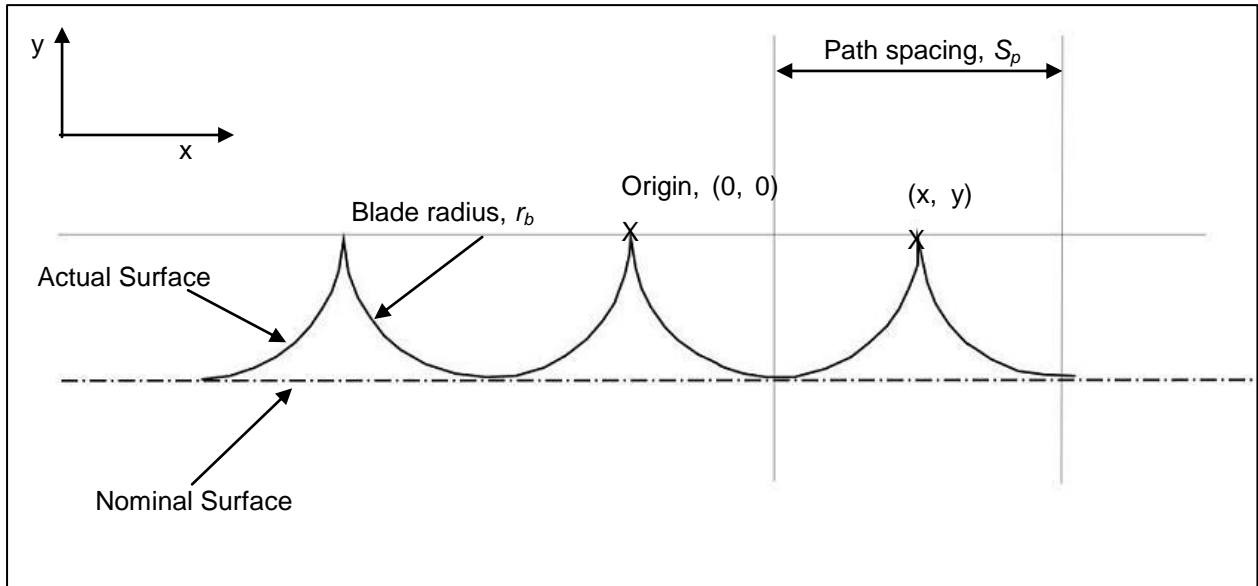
Cross-sectional geometry of a flat surface cut with a round-nose tool
